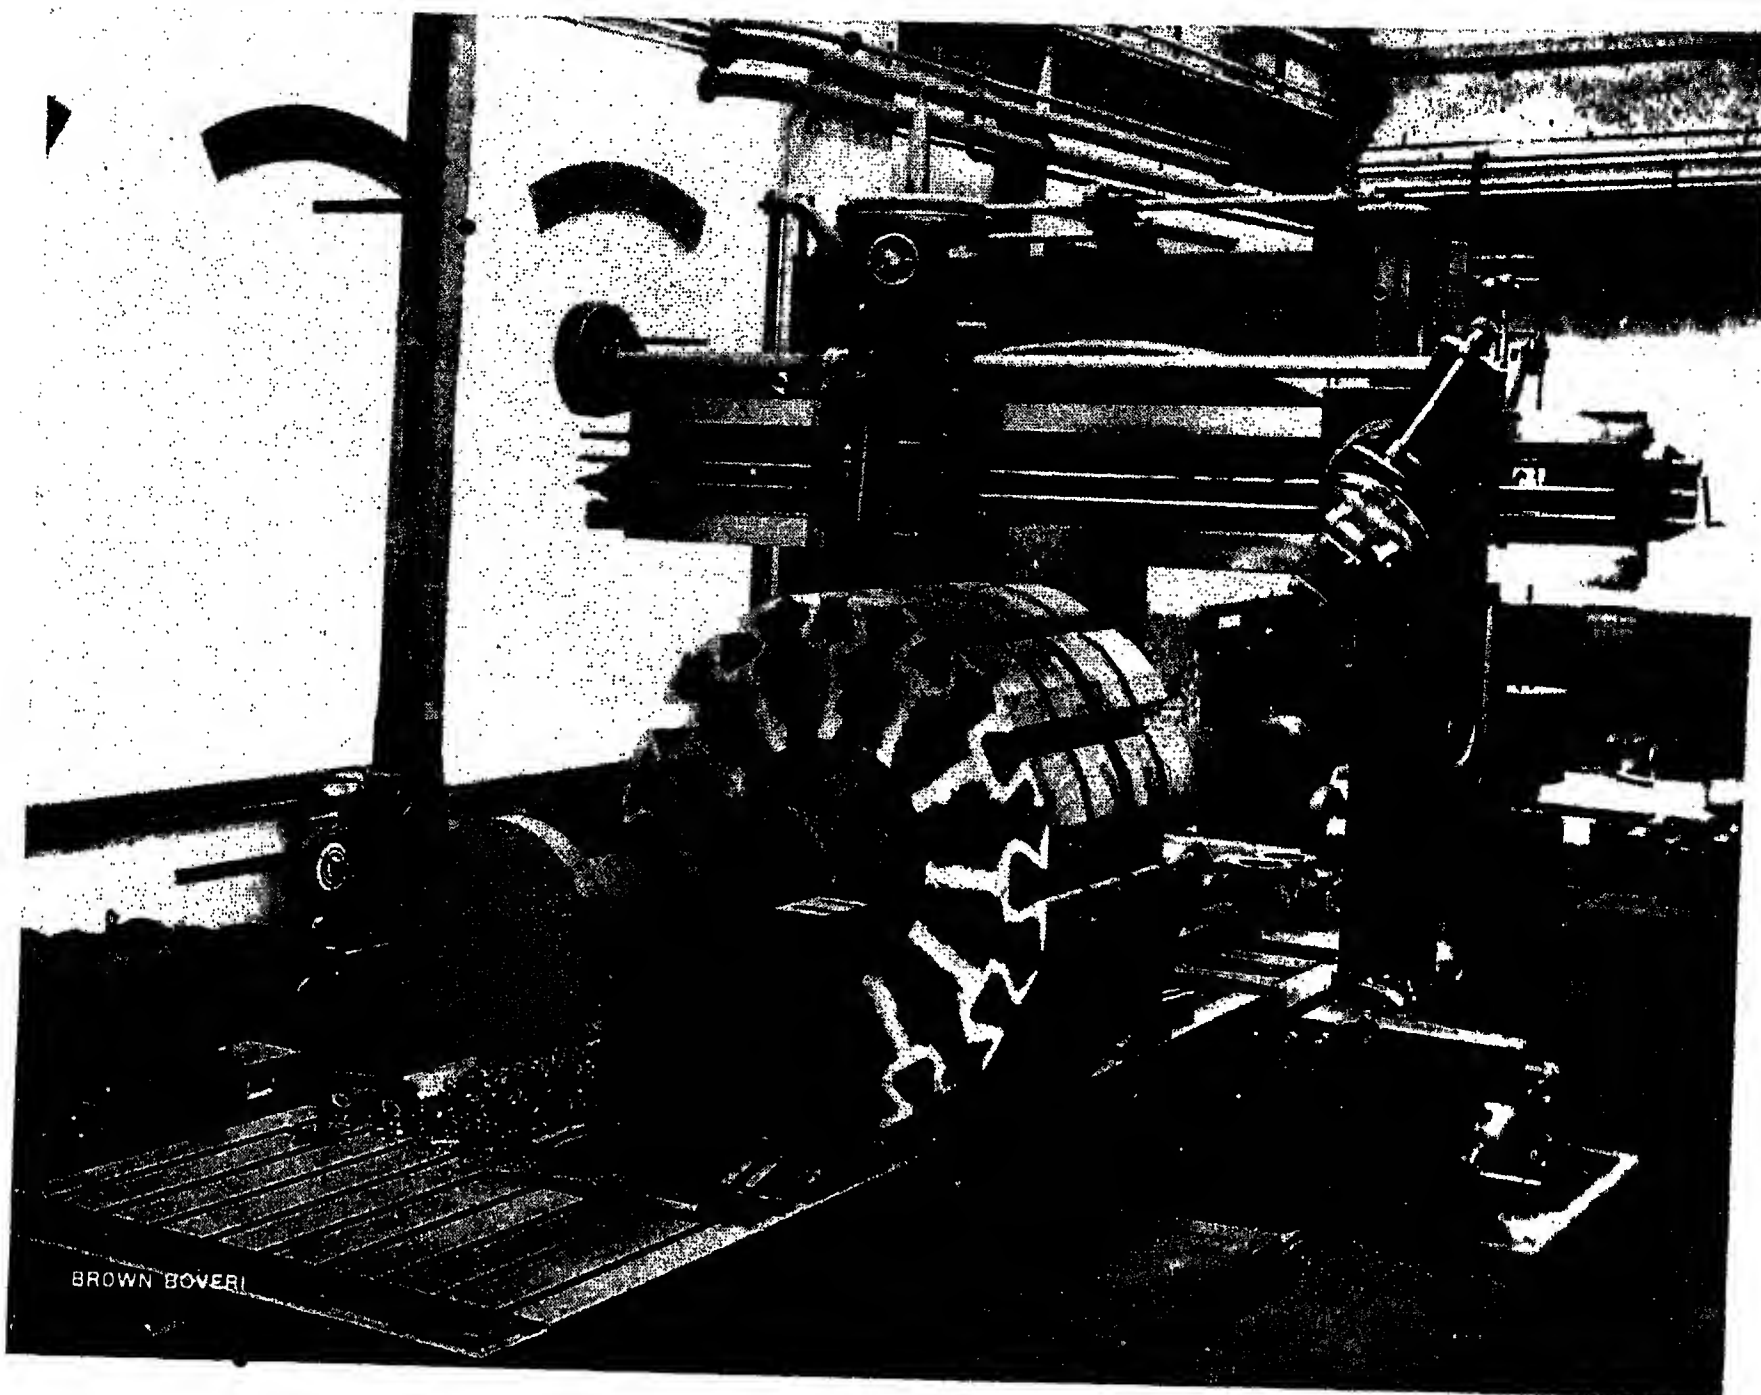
Rotor of a three-phase alternator 16,500 kVA, 500 r. p. m. on a planing machine for the finishing operations on the dovetail grooves.
